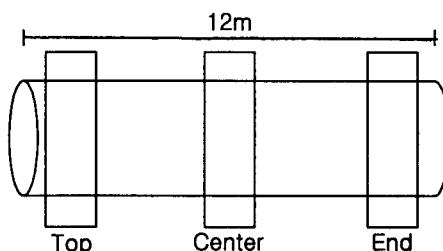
Specimen picking position in Welded Steel Pipe
